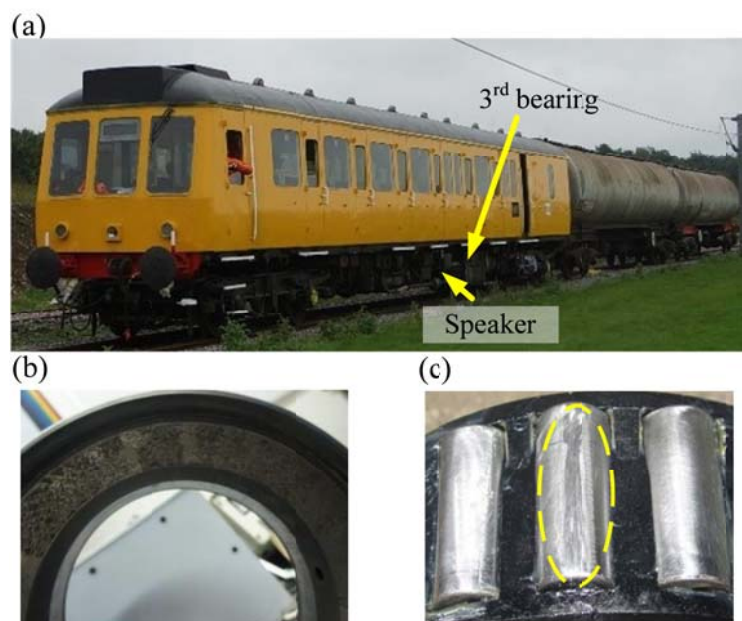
(a) Test train (b) Test bearing with outer race fault (c) Test bearing with roller fault
